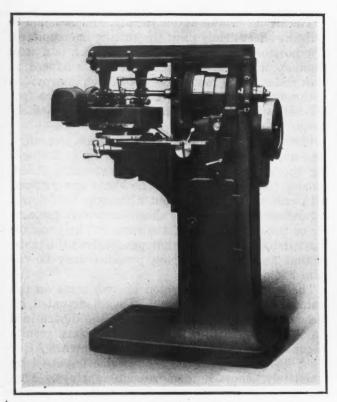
Pfauter Automatic Spindle-hobbing Machine
